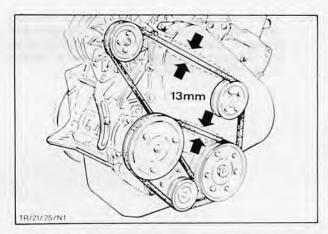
Adjust alternator and vacuum pump V-belt tension
